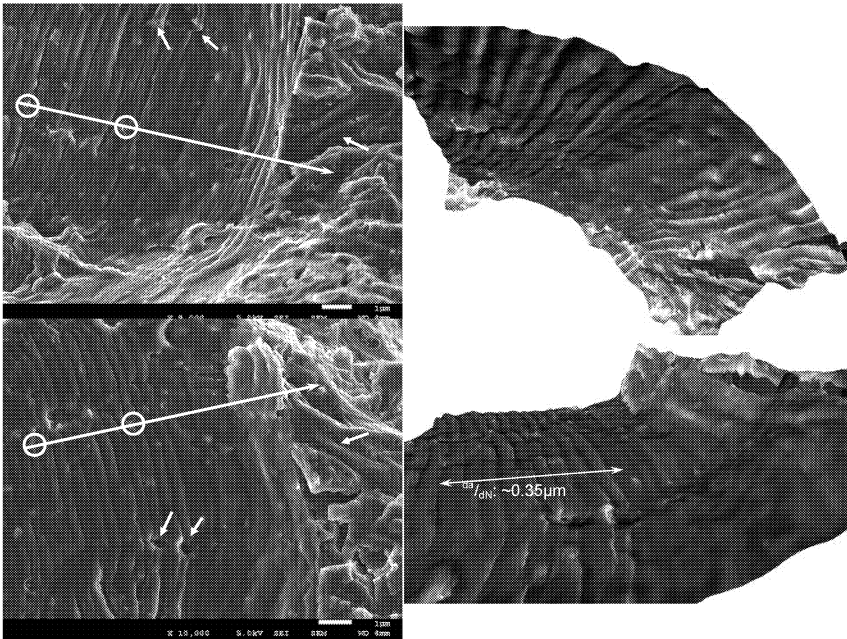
Matching fracture surfaces with corresponding paths (left). The technique enabled 3D representations of matching surfaces (right).
